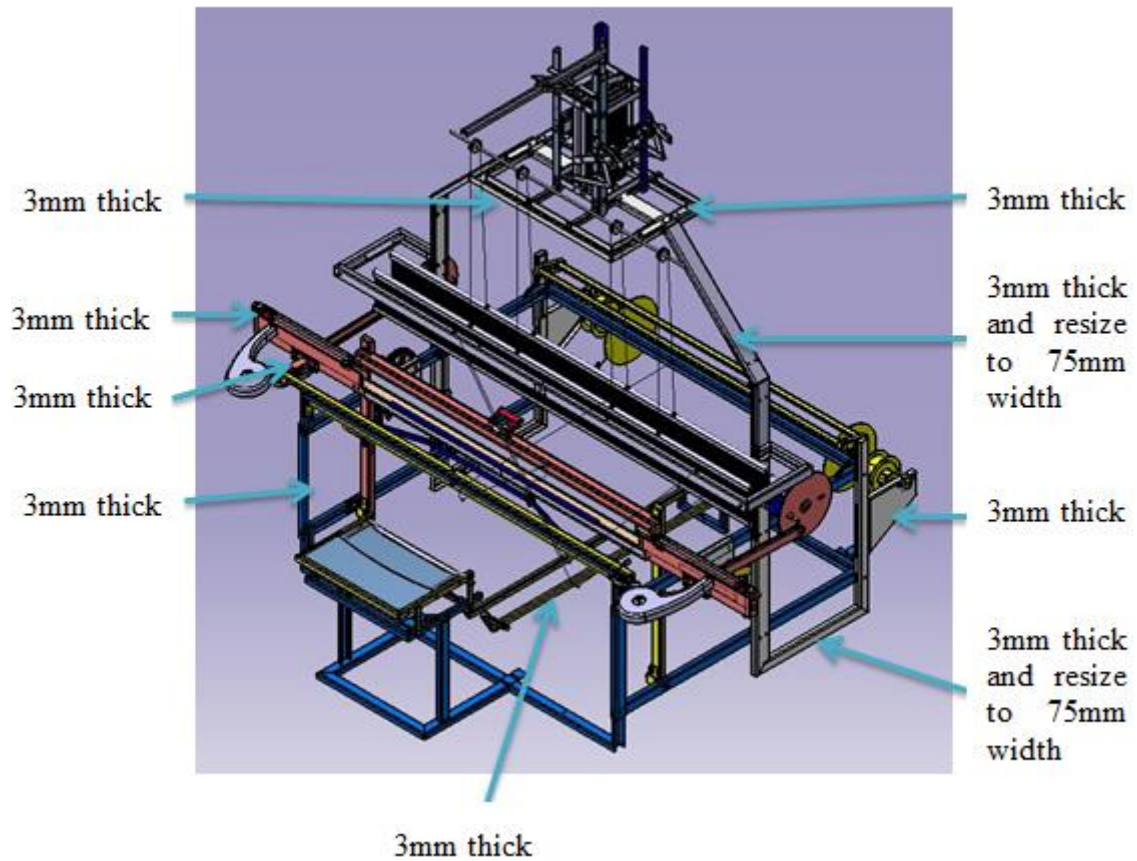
3mm sheet thickness parts to avoid vibration of De-sign semi-automatic handloom
